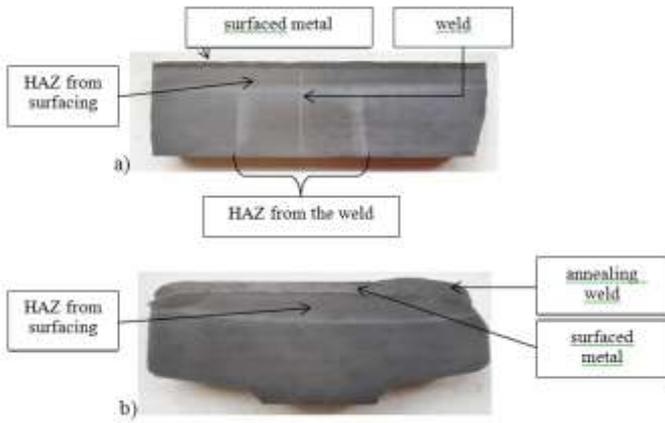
Macrostructure of a welded rail joint after single-layer surfacing: a) longitudinal sample; b) transverse samples.
